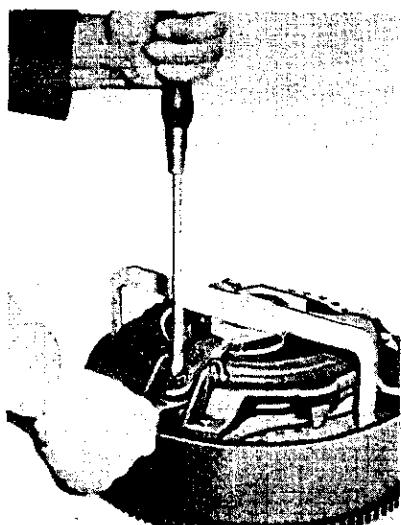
A—Using special tool to adjust the dual plate clutch release lever height on 354, 364 and 384. Adjustment must be made with a NEW 11-inch driver disc and RELEASE LEVER PLATE installed.
